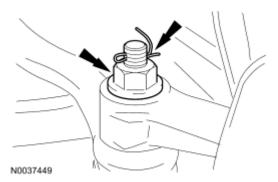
Locating Tie-Rod Ends Nuts And Cotter Pin Courtesy of FORD MOTOR CO.
